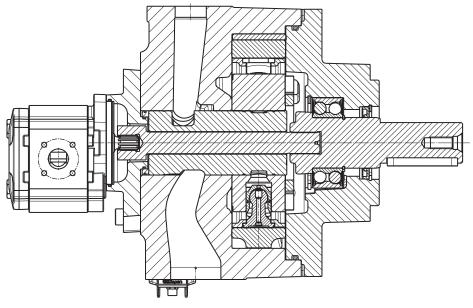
Radial piston pump with tandem mounted gear pump using SAE-A adapter
